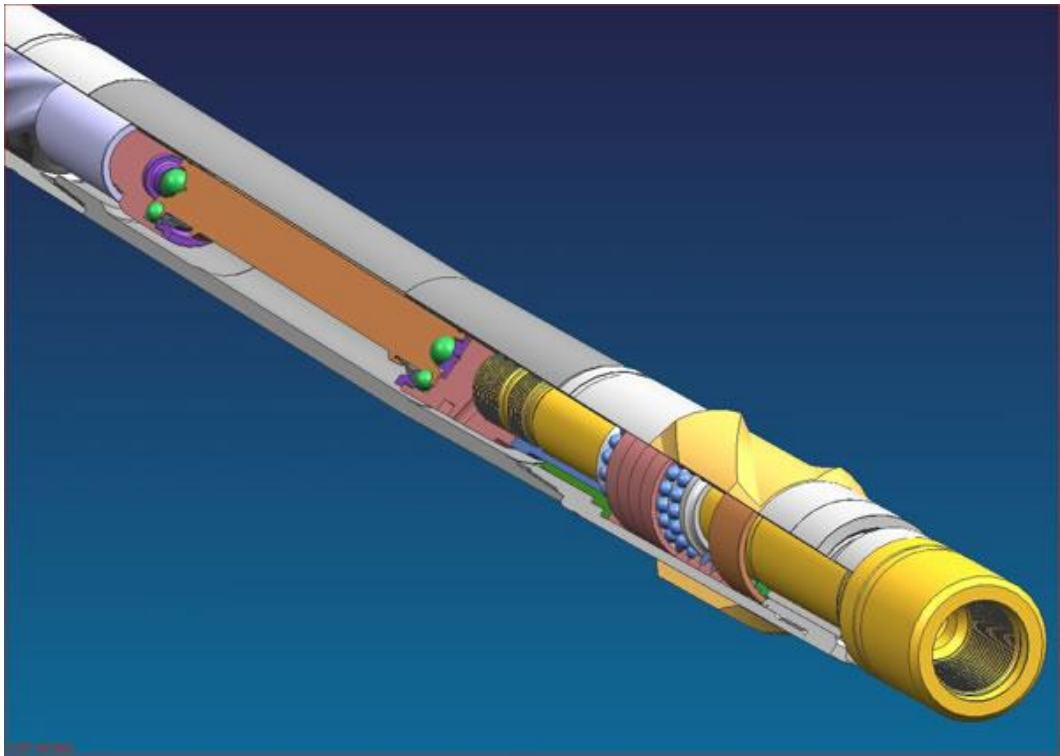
Transmission Assembly (<http://steelmakingmachine.com>, 2017)
